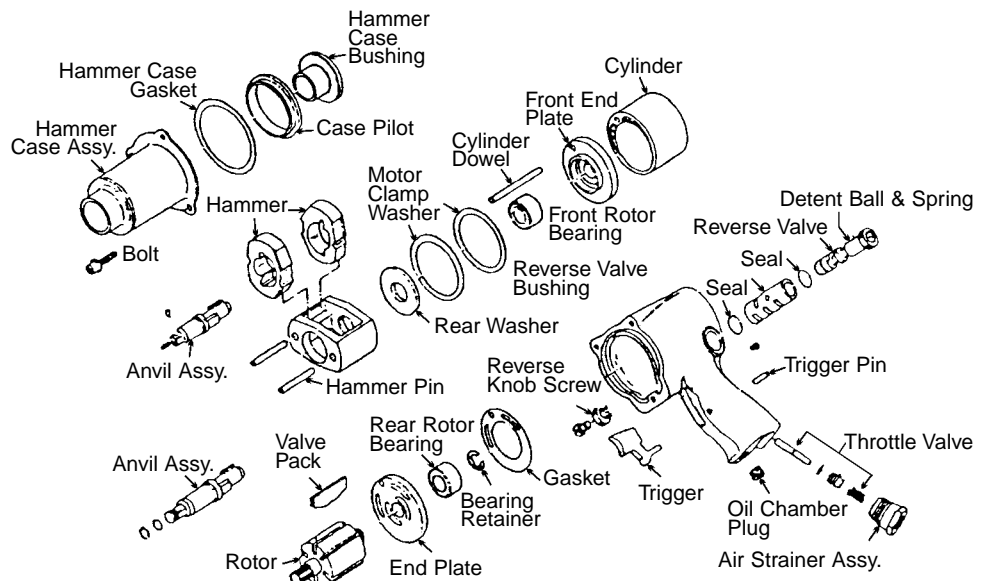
Air Impact Wrench (Courtesy of Ingersoll-Rand)
